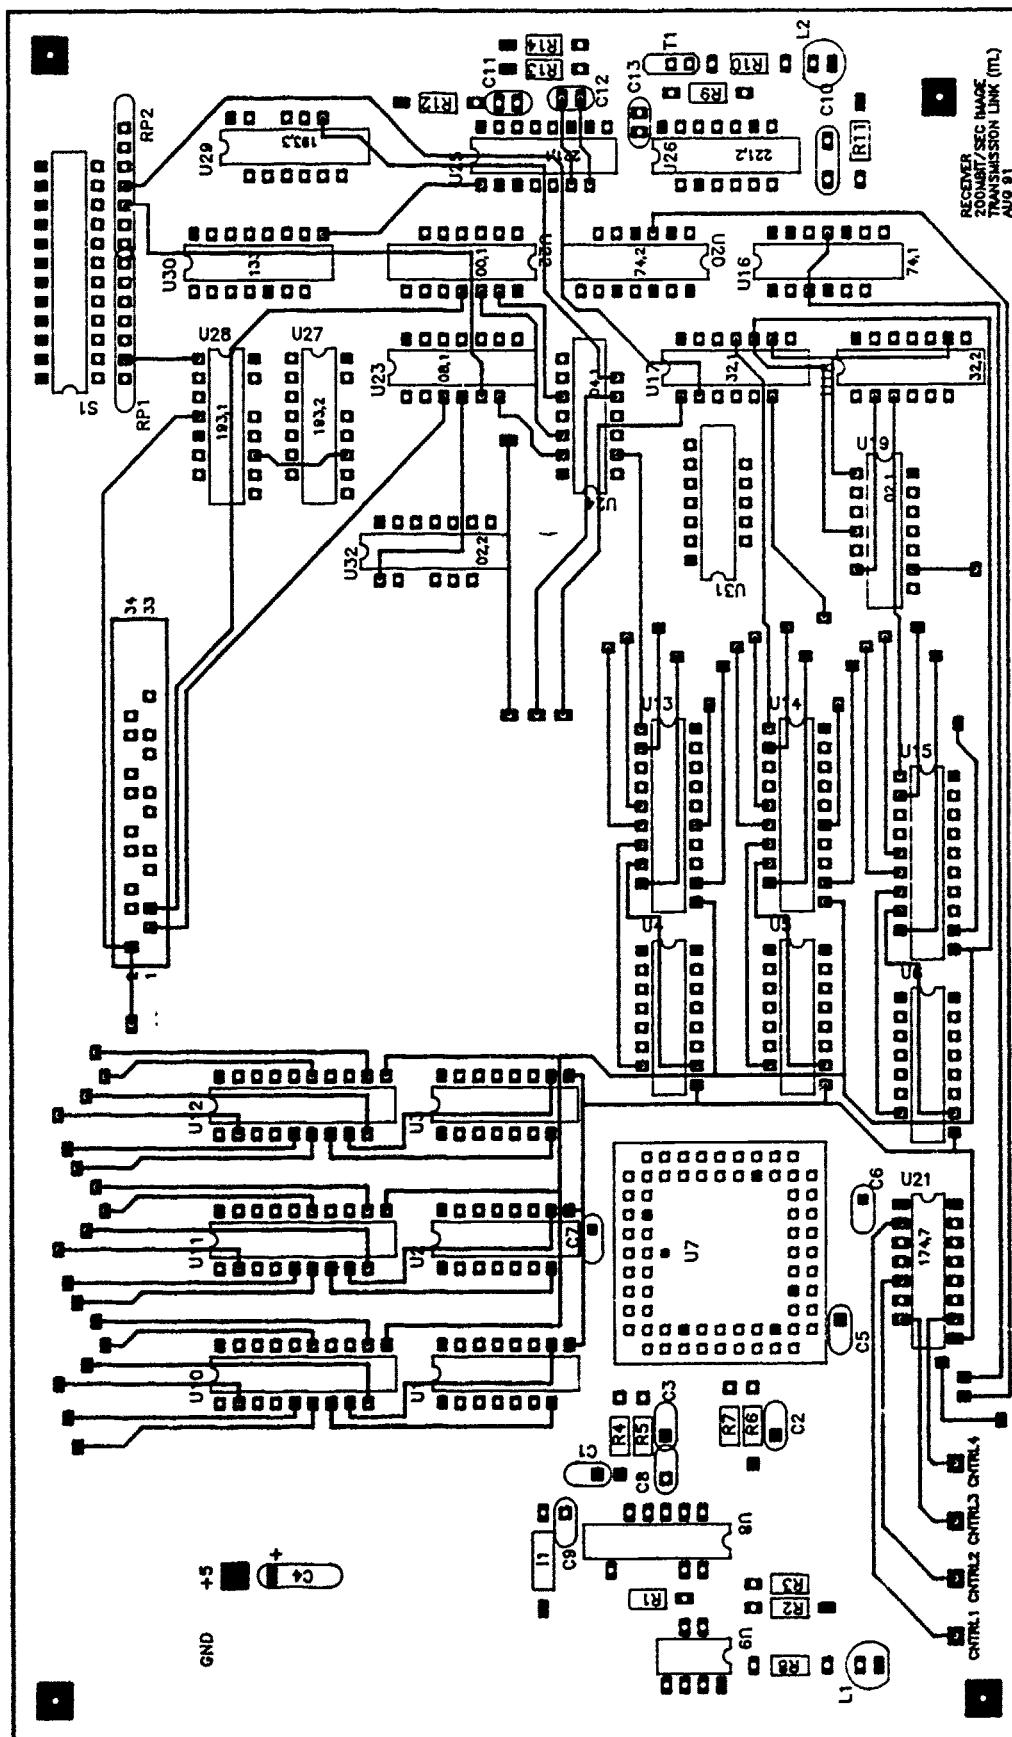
ITL Receiver Board - PC Board Layout (TOP)
